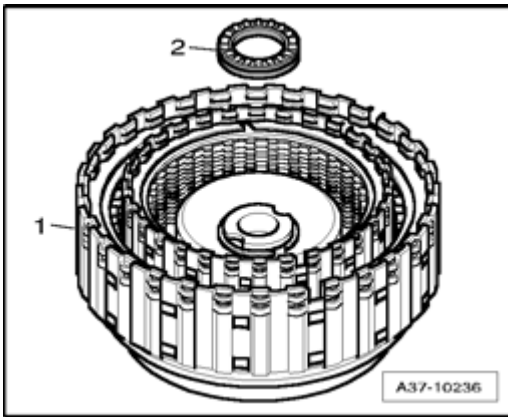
Axial Needle Bearing And Clutch "A/B"
